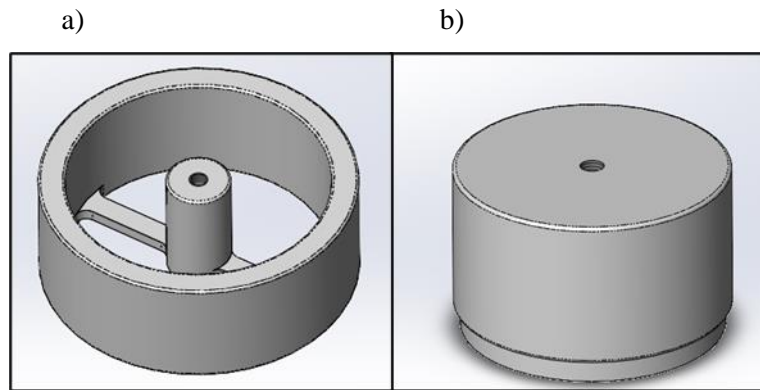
WCH final design: pillar 24 (a); pillar 48 (b)
